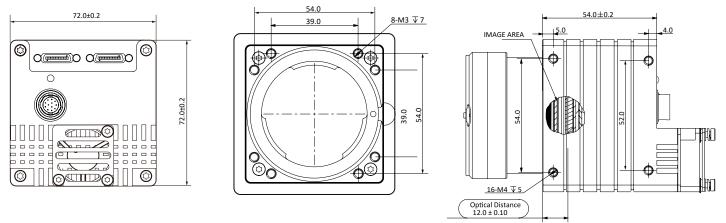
Mechanical Dimensions (in mm) for Cameras with 72 \* 72 \* 54mm housing (F interface).
